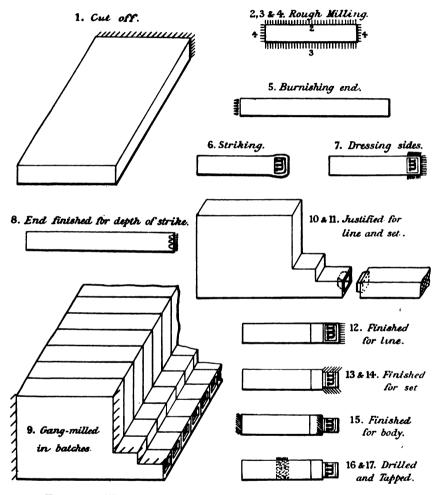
Wicks rotary typecaster matrix; operations in machining. Scale: full size.
